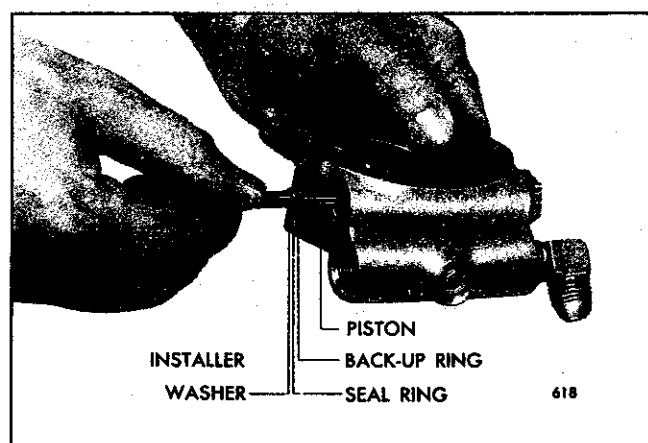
Installing Pressure Relief Piston, Back-Up Ring, Seal Ring and Washer in Pump Body with Installer J 7192
